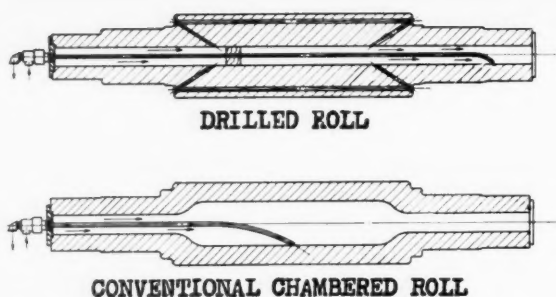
Cross-Section of Drilled and Bored or Chambered Calendar Rolls
